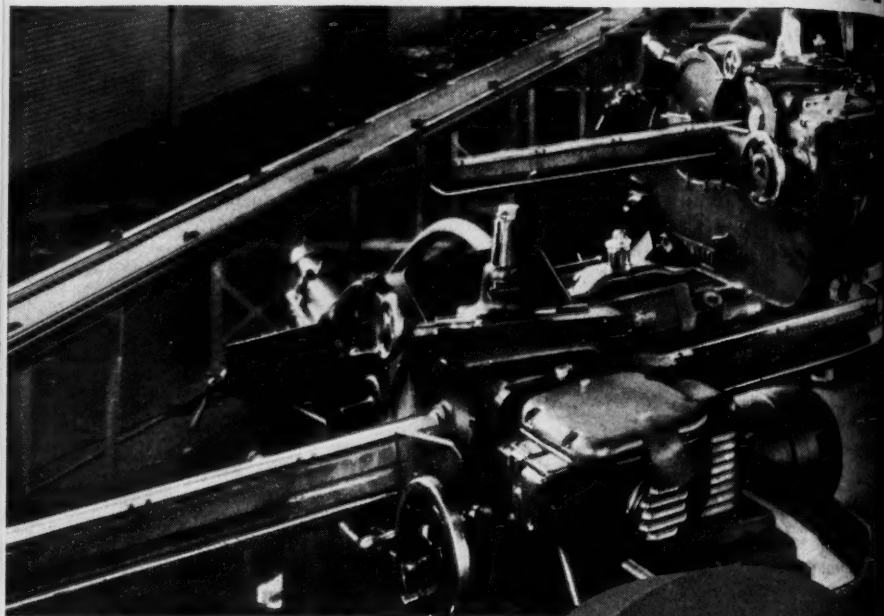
The blocks come to these machines on the lower conveyor line at the left and are pushed directly onto the elevating section, with which they are elevated to the level of the three conveyor lines extending through the machine.
